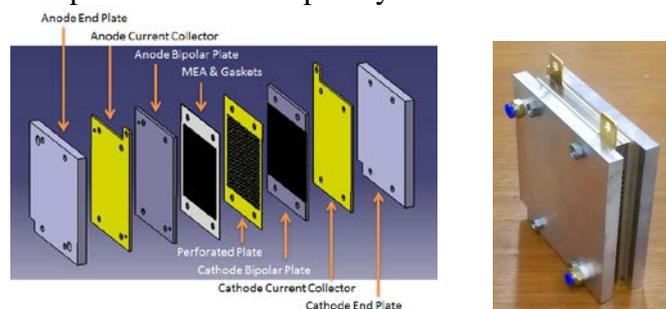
Exploded view and the picture of the single-cell open-cathode PEMFC.
